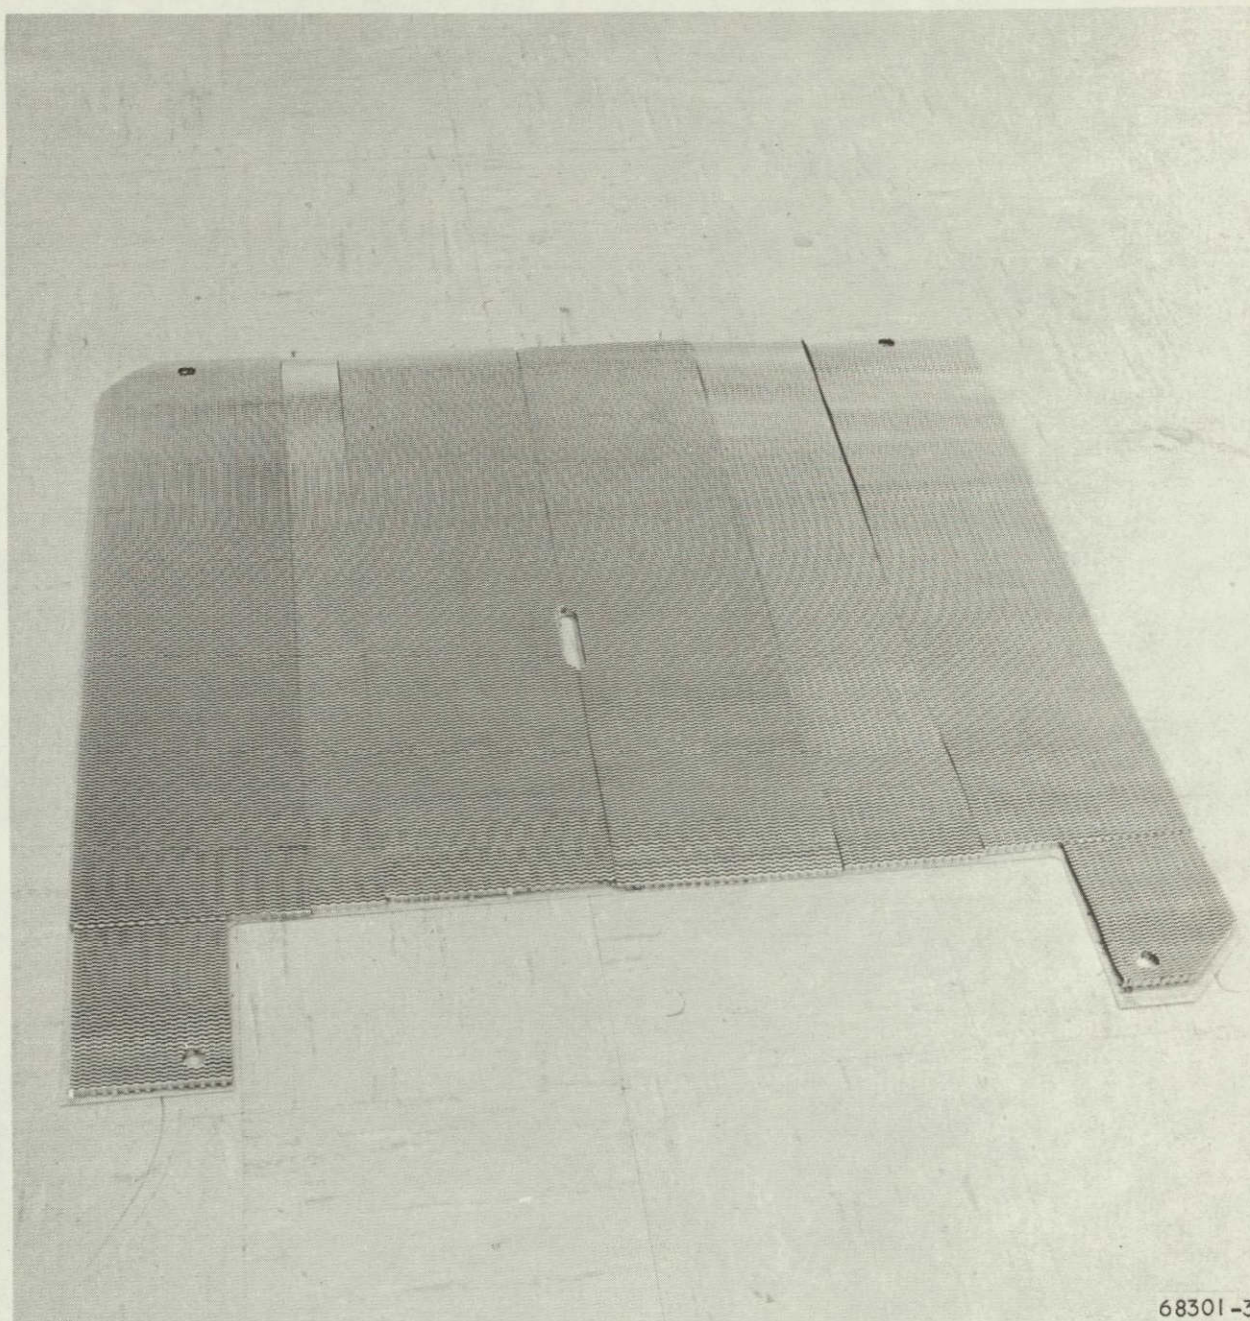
Assembly of Structural Sandwich Prior to Brazing
